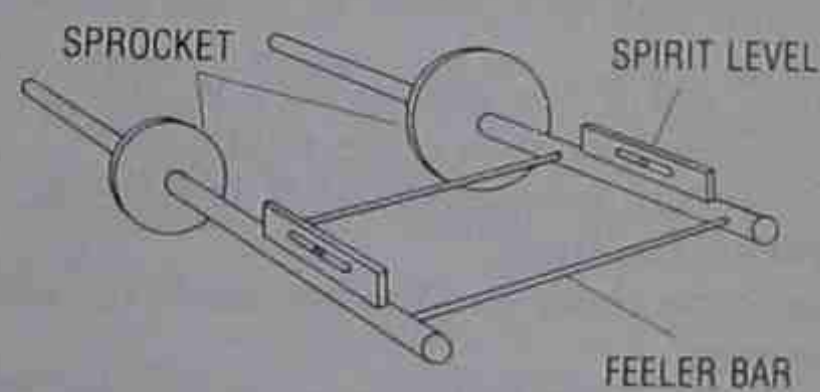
Checking for level and parallel alignment of the shafts.
